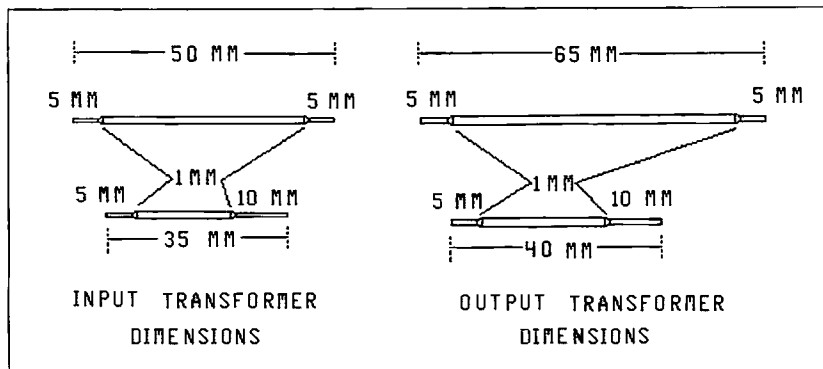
Preparation of the transformer coax. Cut the transformers to the lengths shown, and strip the outer conductors. The inner leads that are to be 5mm should have their outer conductors stripped 6mm and the leads that are to be 10 mm should be stripped 11mm. Then strip the insulator that goes between the inner and outer conductors, leaving 1mm of insulator as shown, which will leave the inner conductors bare at the proper lengths.
